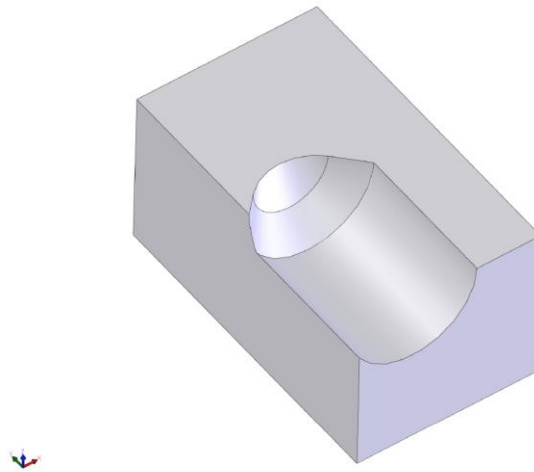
The second piece of the clamp for section 4.2.7, showing the surface where it will come in contact with the implant's keel side.
